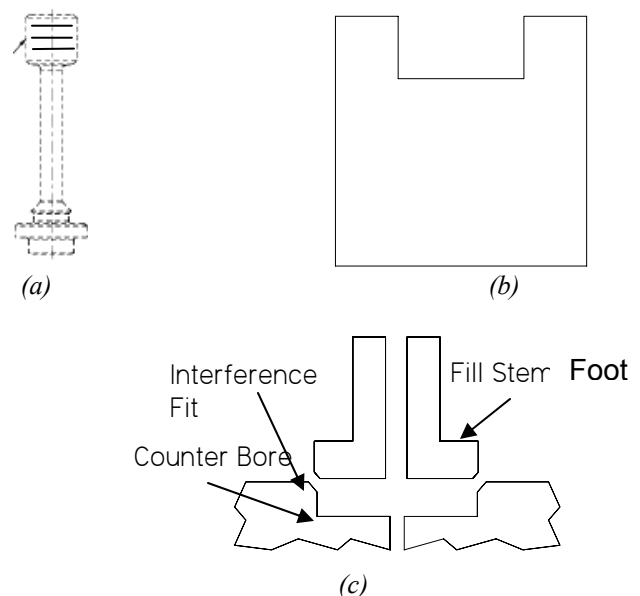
Sketch of components (a) fill stem (b) test base and (c) an assembly prior to welding.
